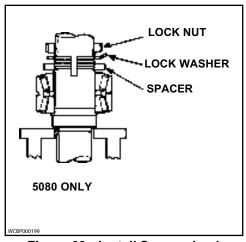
Install Spacer, Lock Washer and Lock Nut
